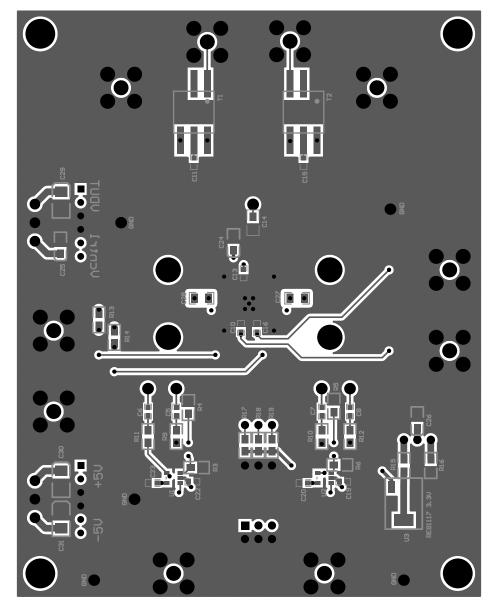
VCA2617EVM PCB Bottom Layer (Bottom View)
